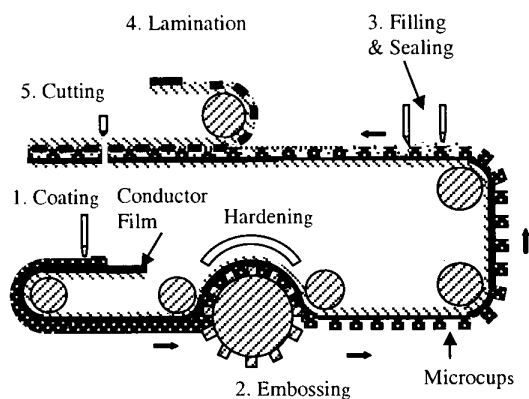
Schematic process flow of a typical SiPix roll-to-roll EPD manufacturing process
